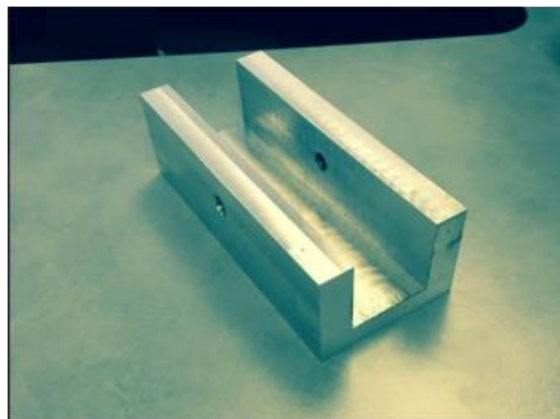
Seat slider rail for seat position adjustment. This piece was manufactured at Santa Clara University and sent to Chavez welding to be welded to the rest of the frame
